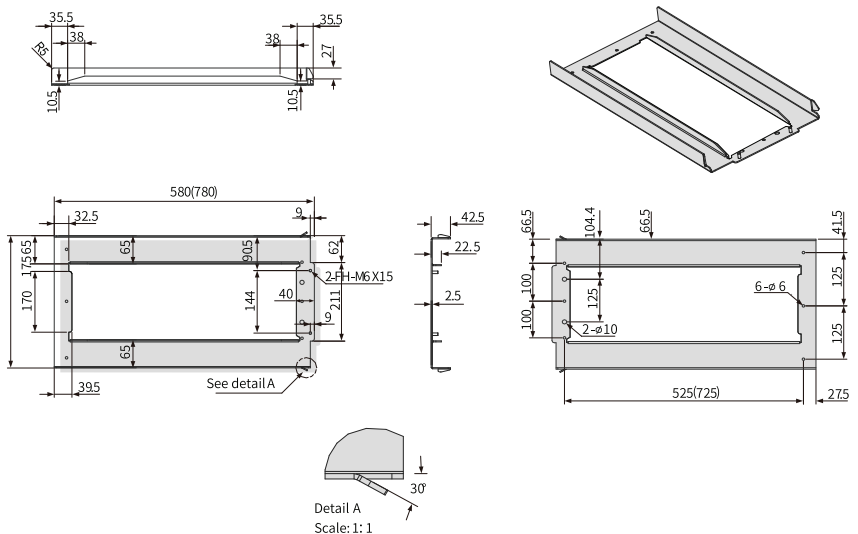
Dimensions of bottom mounting bracket for T11 models (mm)
